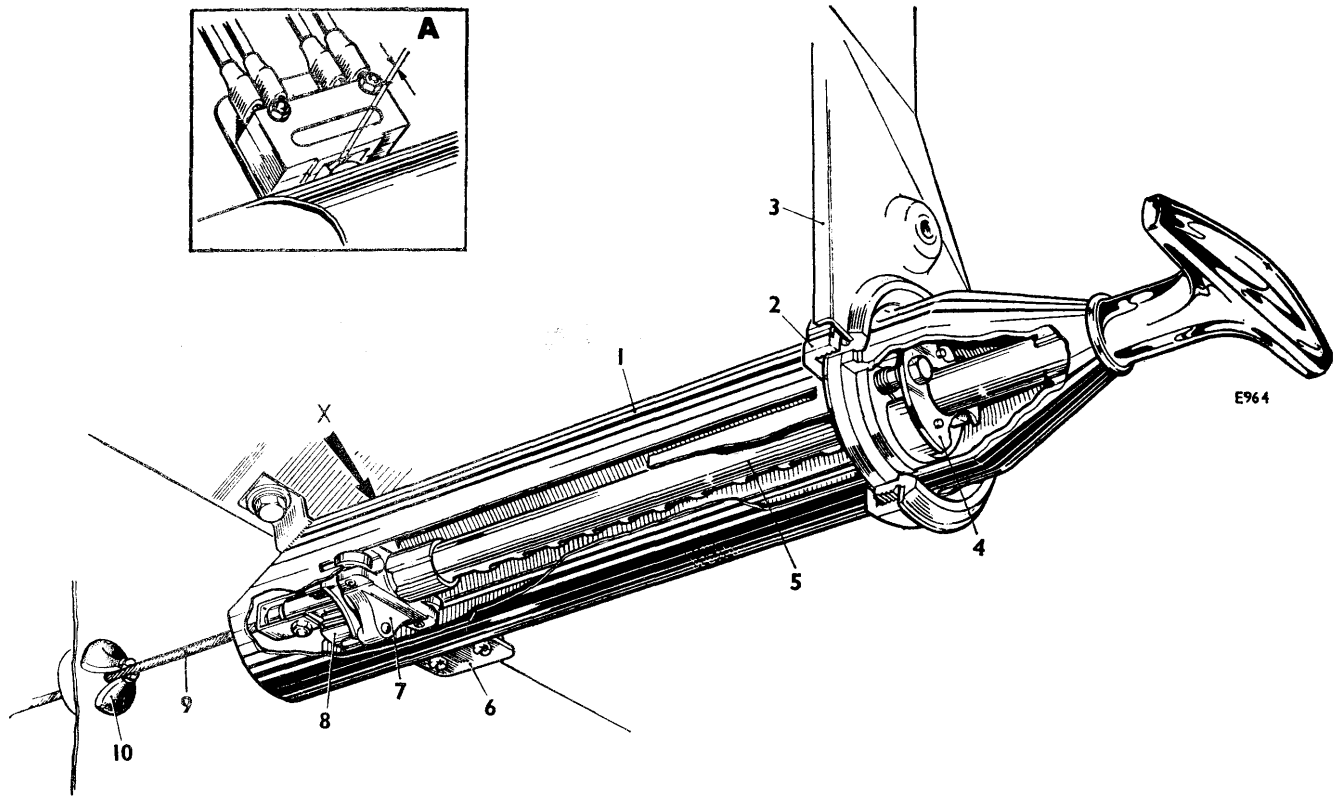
HAND BRAKE RATCHET ASSEMBLY
